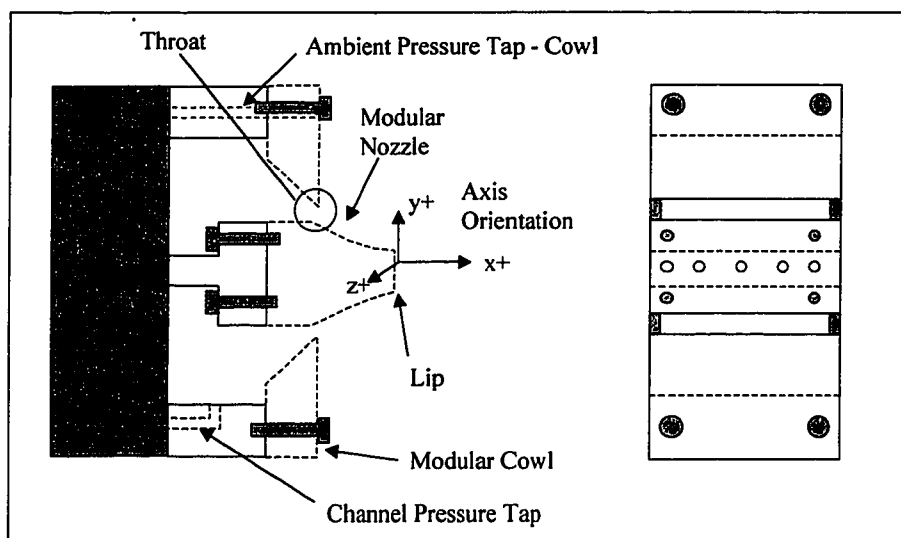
Nozzle Holder and Plug Nozzle Set Design
